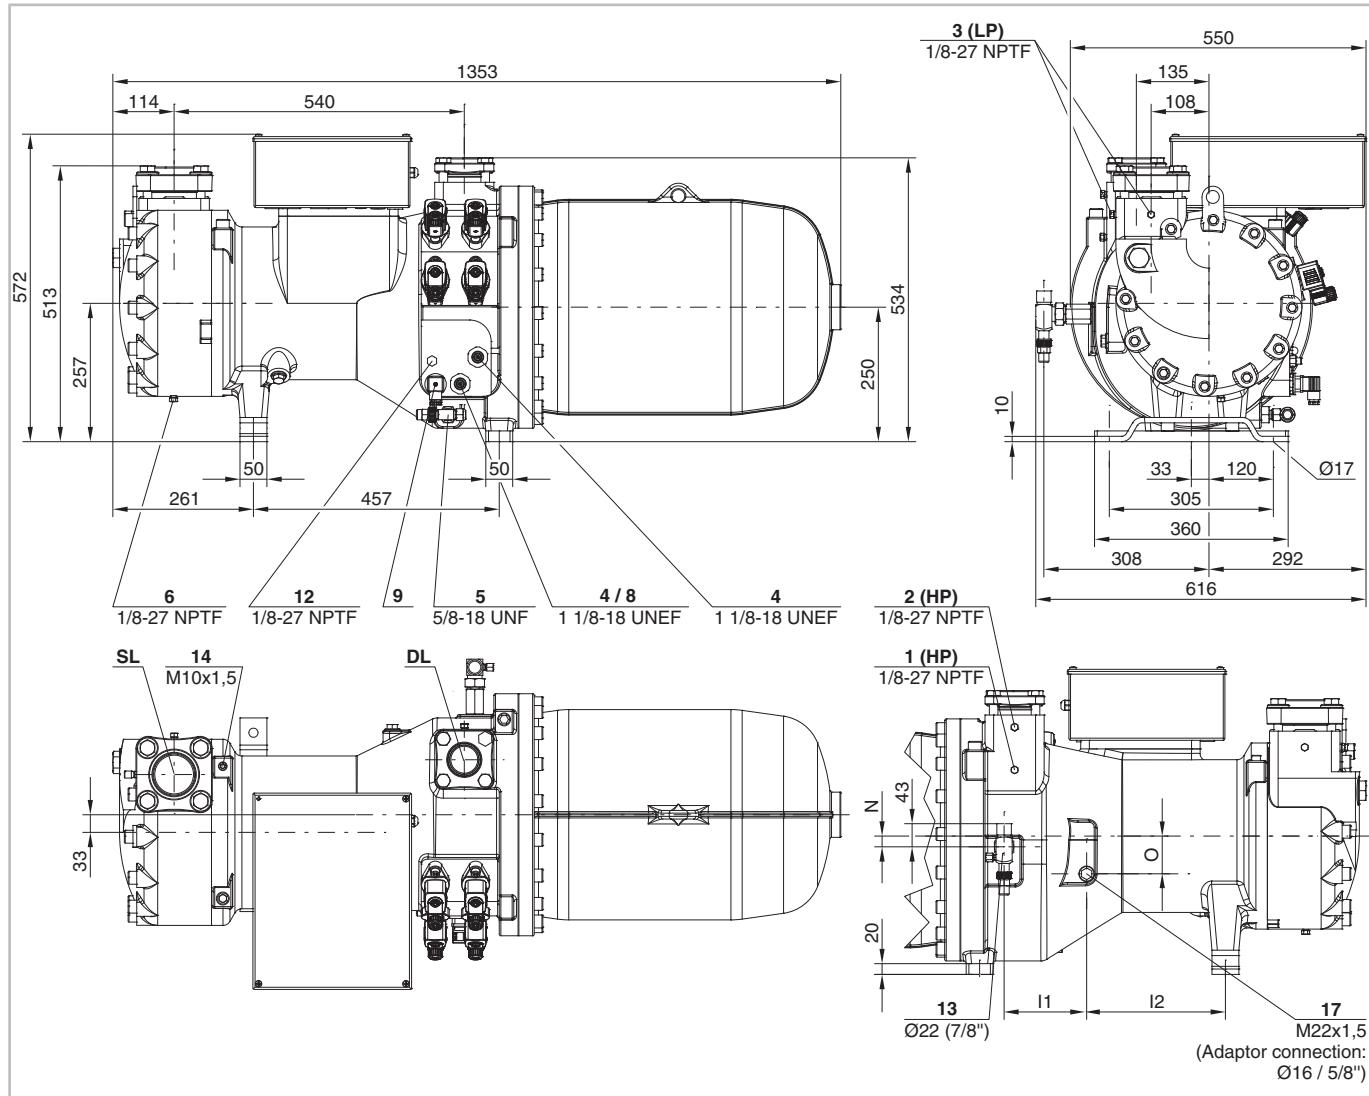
Dimensional drawing CSW7573-60Y .. CSW7593-90(Y)
